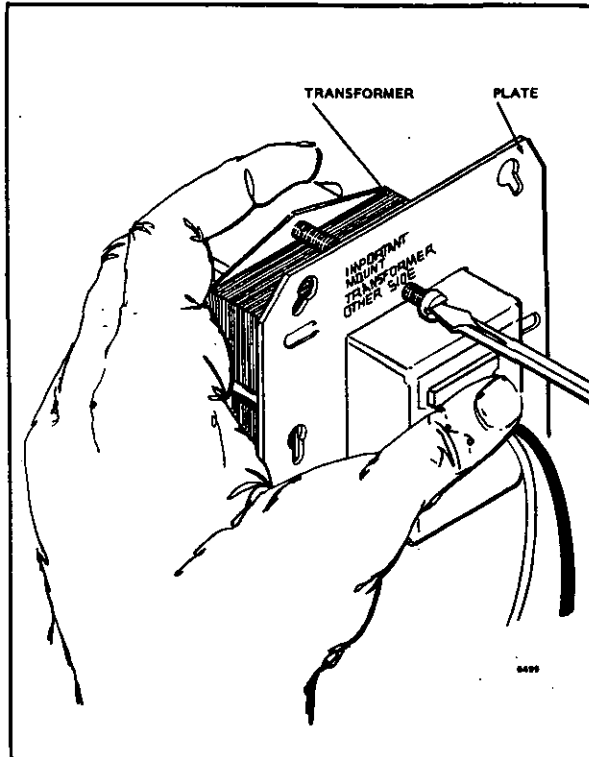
SECURE PLATE TO TRANSFORMER WITH MOUNTING SCREW.
